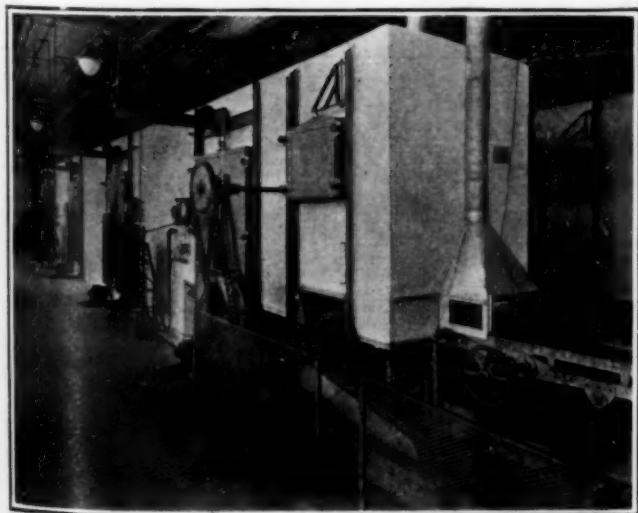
Heating Section of Machines For Making Cork "Sticks"
